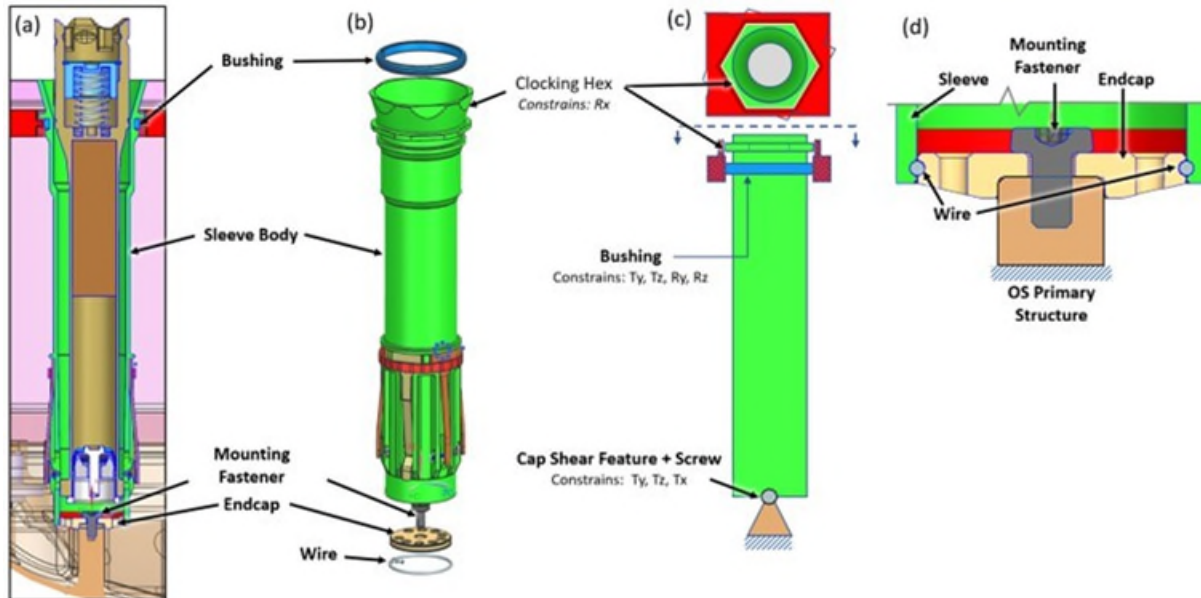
(a). Sleeve mounting shown in context of OS primary structure. (b) Sleeve structure exploded view. (c) Sleeve kinematic mounting diagram. The sleeve endcap behaves like spherical joint (over a small range of motion), while the bushing allows for axial and radial CTE mismatch with respect to the OS primary structure. (d) Cross-section of endcap wound-wire joint and sleeve mounting fastener.
